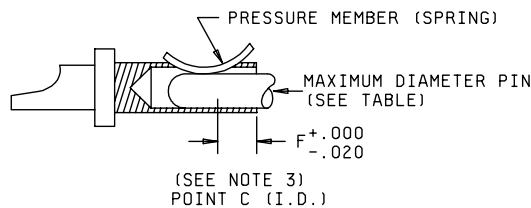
Plating thickness measurement – overall finish (series I, solder).
